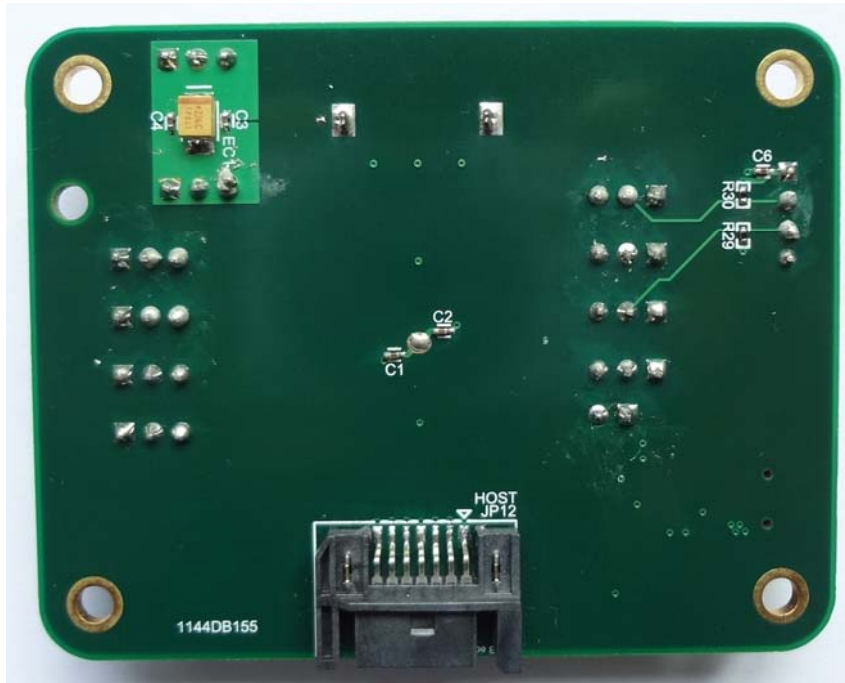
Bottom view of PI2EQX6811ZDE Eval board Rev.A
